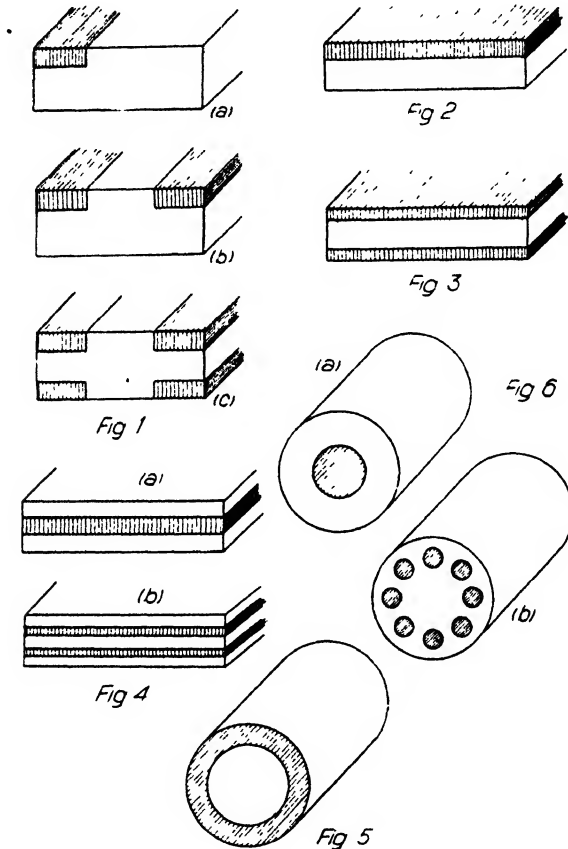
Hacksaw blades; shear blades; knives of all types; and lathe tools.
